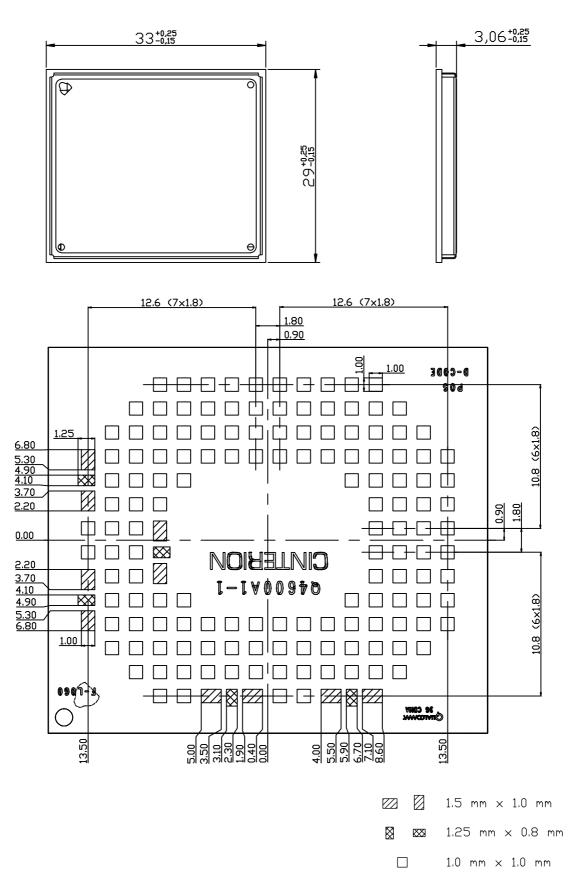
Dimensions of PLS62-W (all dimensions in mm)
